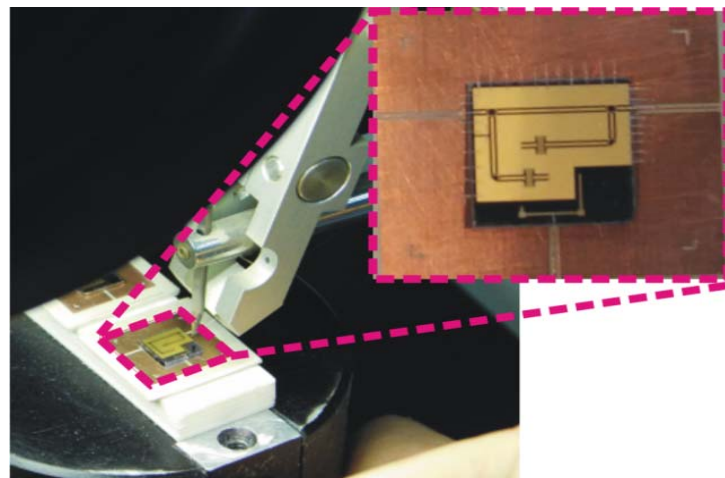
Wire-bonding set-up and details of the wired chip to the PCB.
